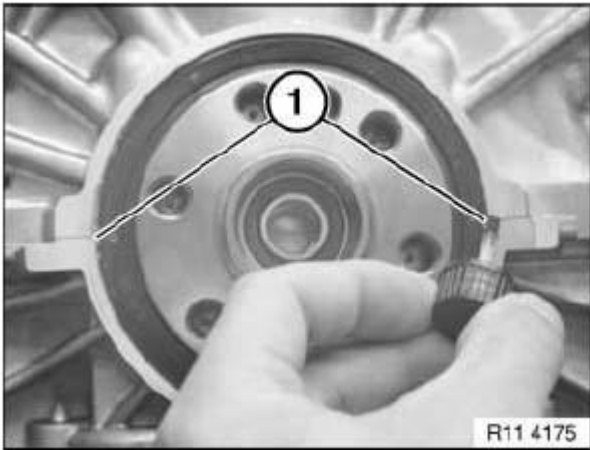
Using Loctite Sealing Compound (171000) On Groove (1 of 3)
